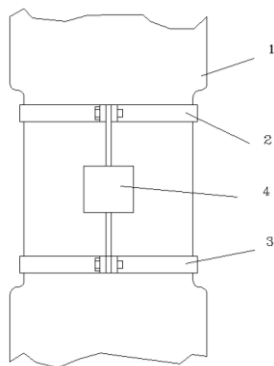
Construction of the sensor longitudinal deformation of the cylindrical chassis parts: 1-cylindrical part of the chassis; 2-the upper fastener; 3-bottom fastener; 4-capacitive
